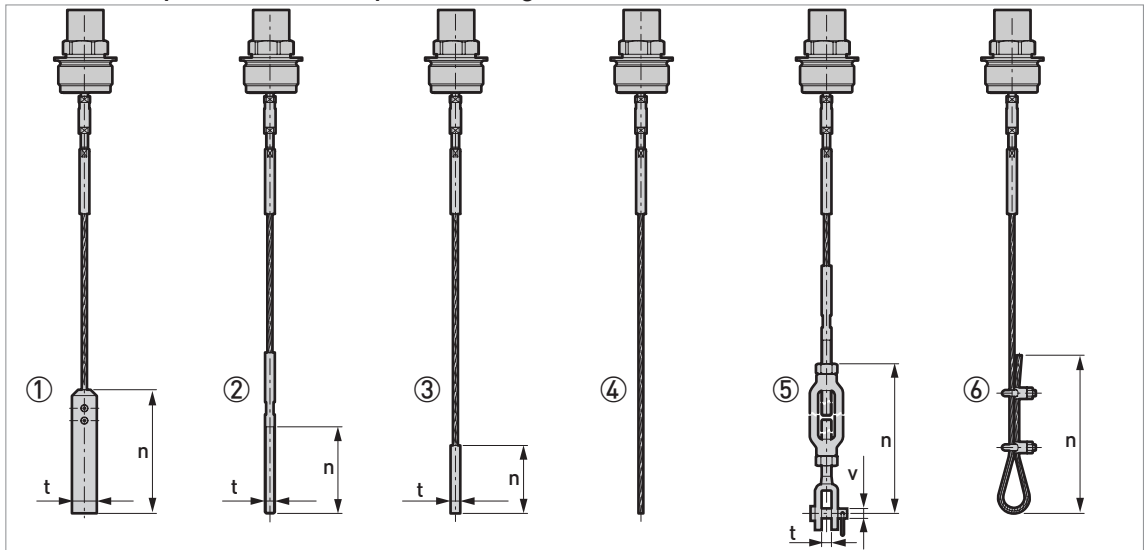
Probe end options for cable probes: single cable Ø4 mm / 0.16"
